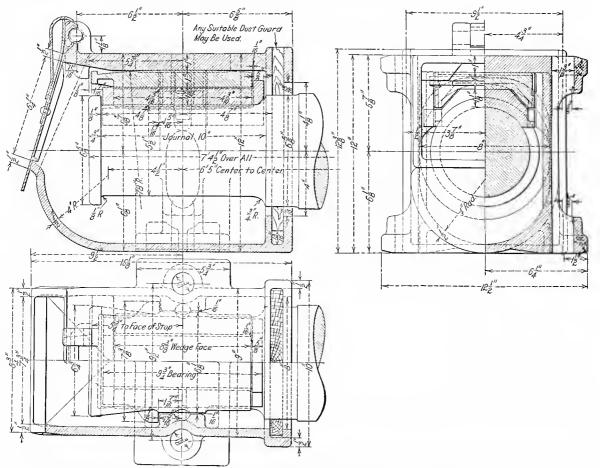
M. C. B. Standard Box and Contained Parts for 5½ in. by 10 in. Freight Car Journal. (M. C. B. Sheet 10.)
